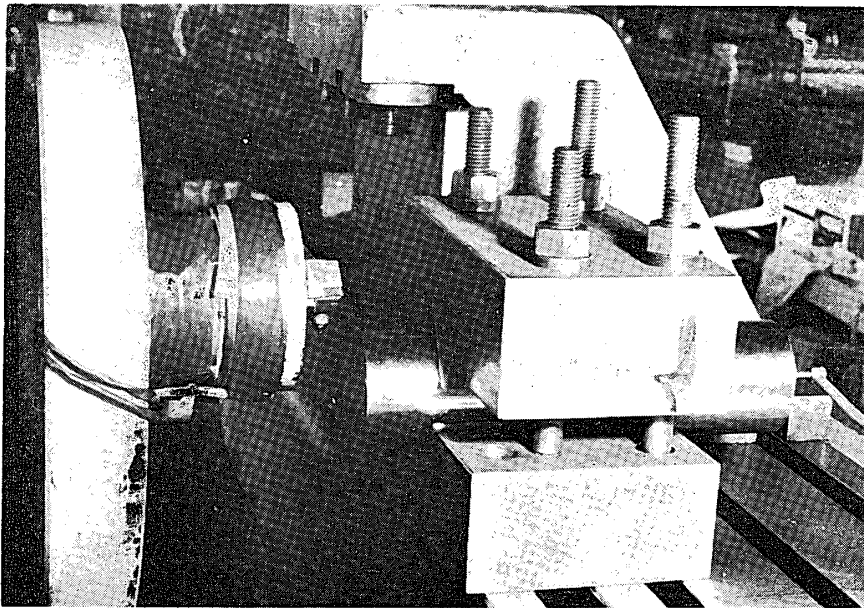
Photograph of cylindrical workpiece and single-blade fly cutter
